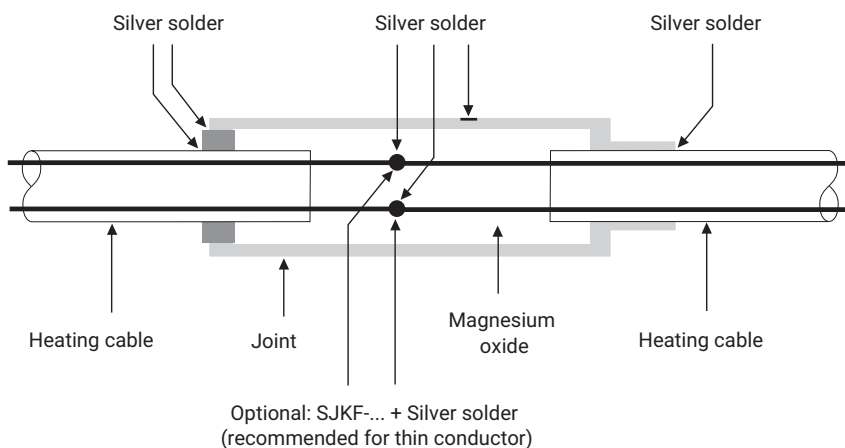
Completed heating cable/heating cable (hot-hot) joint for two conductor cable
